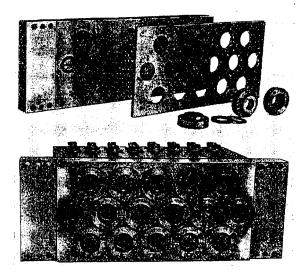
End-plate assembly of battery. The upper photograph shows the exploded view. The screening cans seen in this photograph have since been replaced by the type shown in Fig. 5
